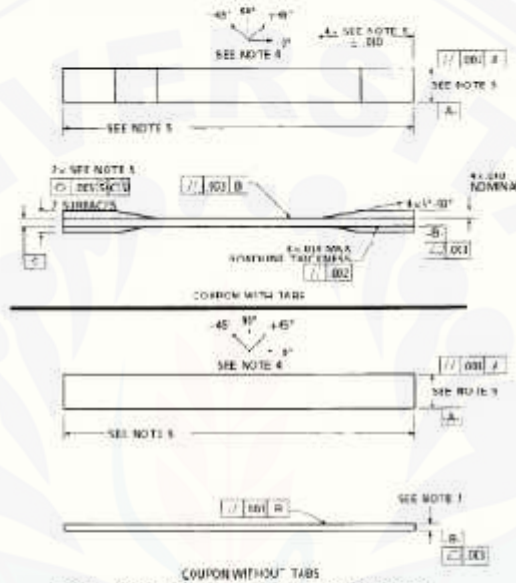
Tension Test Specimen Drawing (inch-pound)
